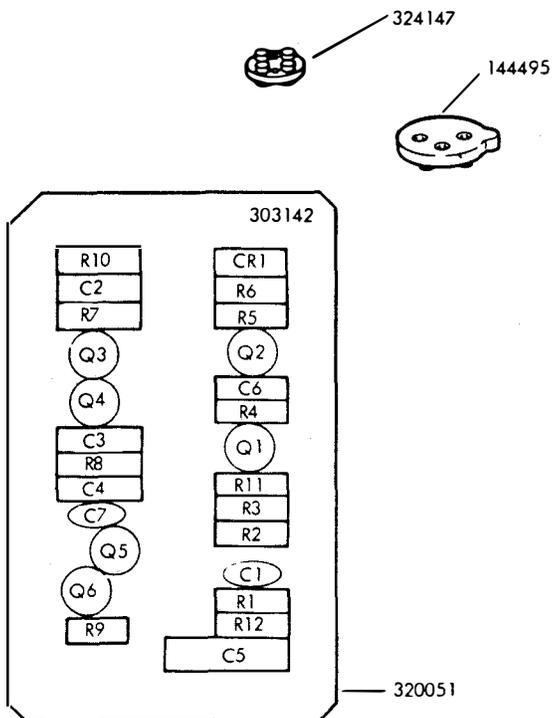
Clutch Magnet Driver Circuit Card 321991
